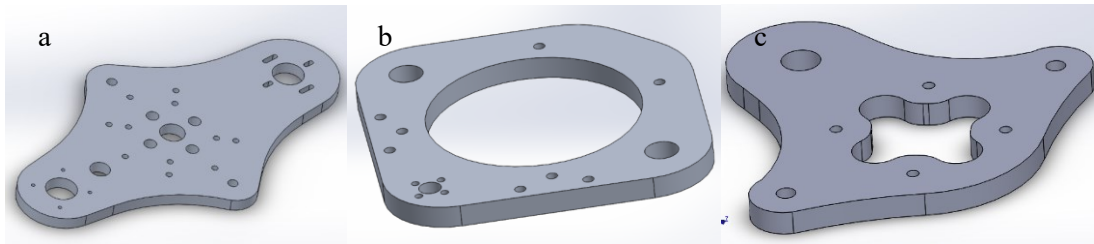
CAD Model (a) Main Platform (b) Gripper Platform (c) Spindle Mount
